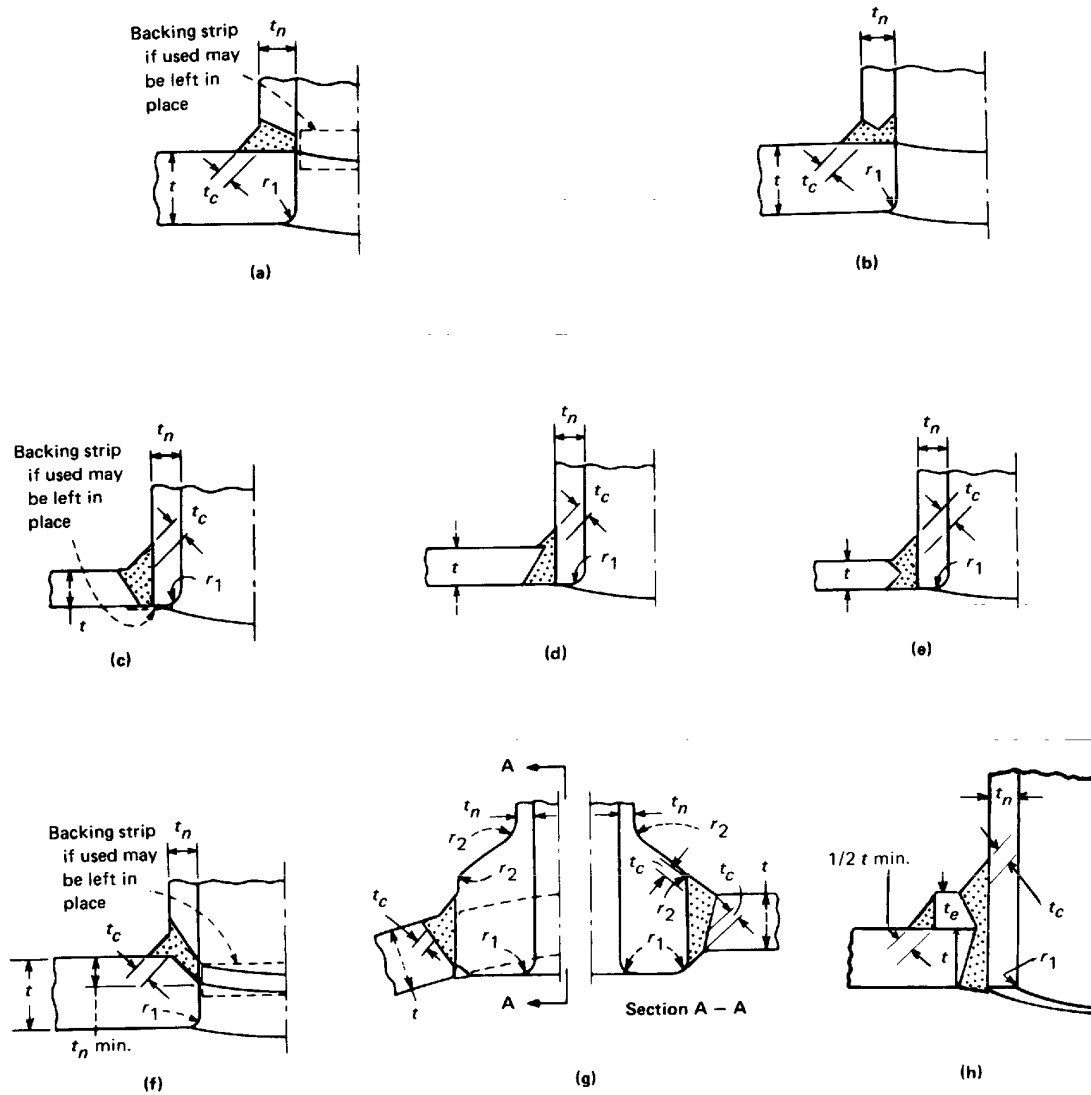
(b)-1 NOZZLES AND BRANCH AND PIPING CONNECTIONS JOINED BY FULL PENETRATION CORNER WELDS
